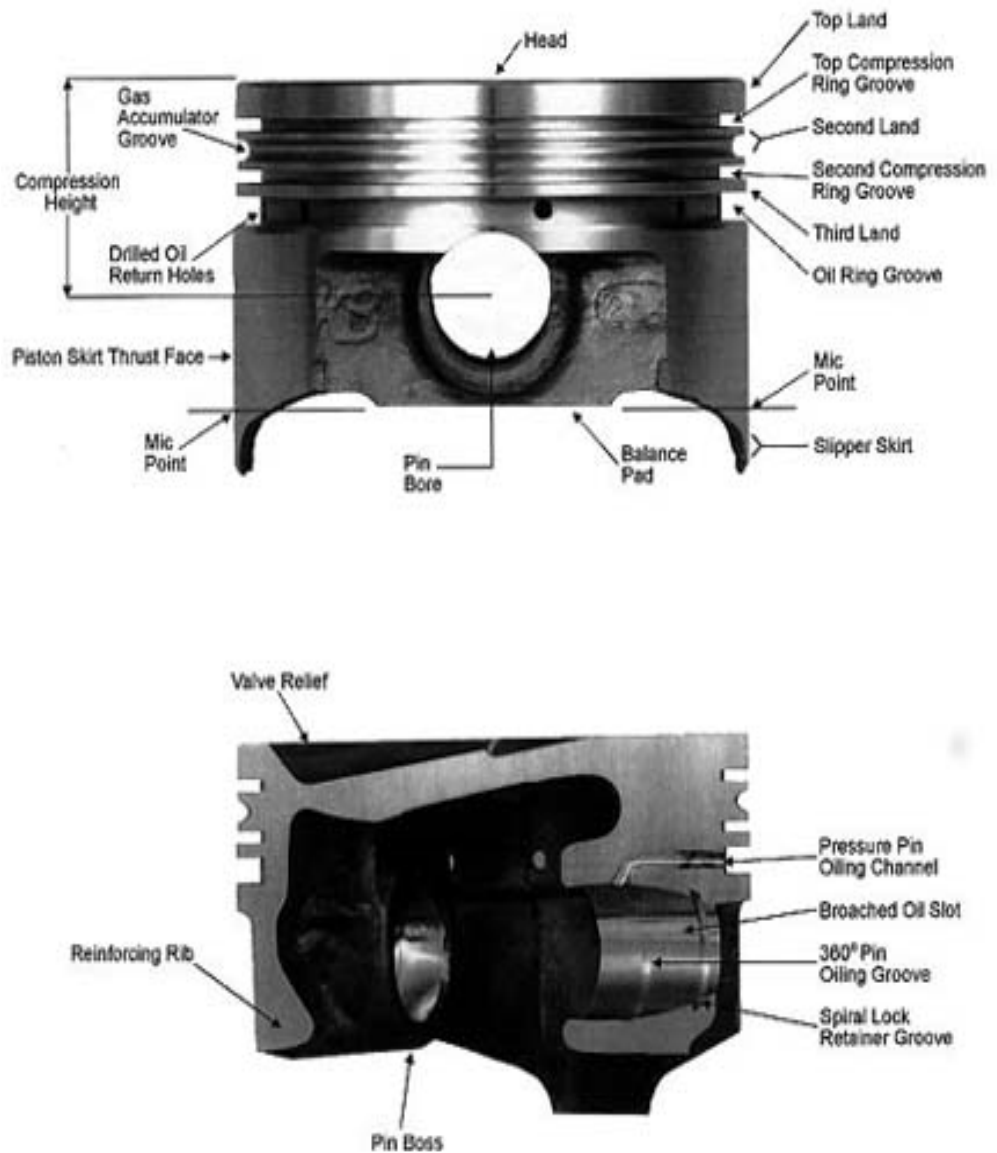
The part of the piston. That are consists of many parts that be assemble.
